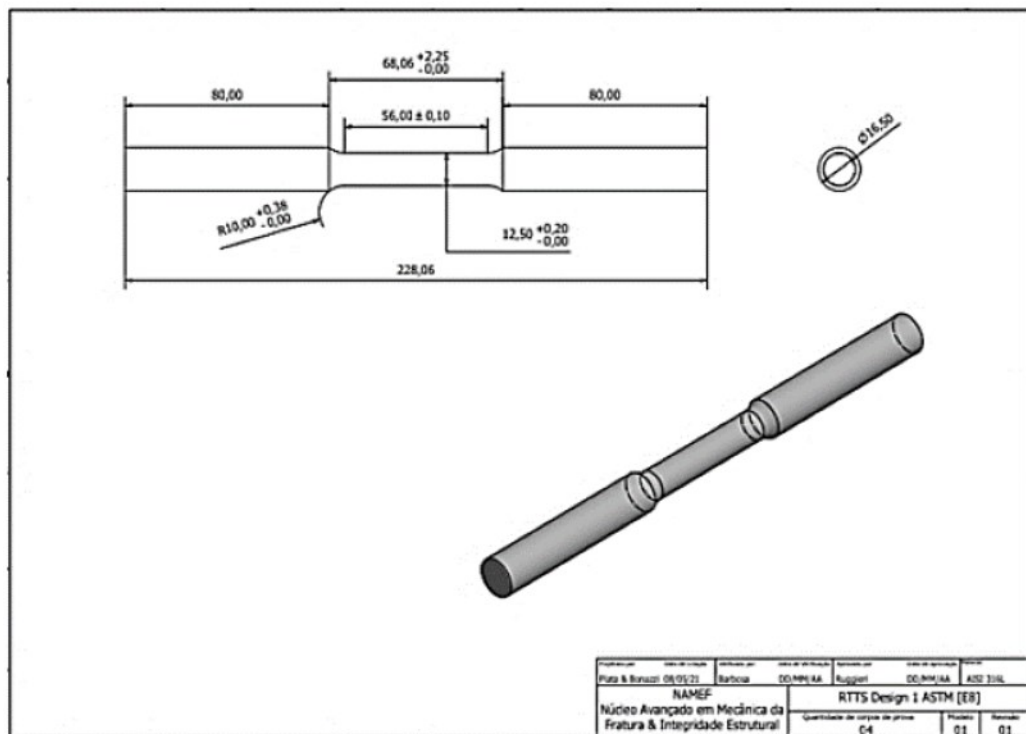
Geometry and dimensions of the 316L stainless steel material tensile test specimen.
